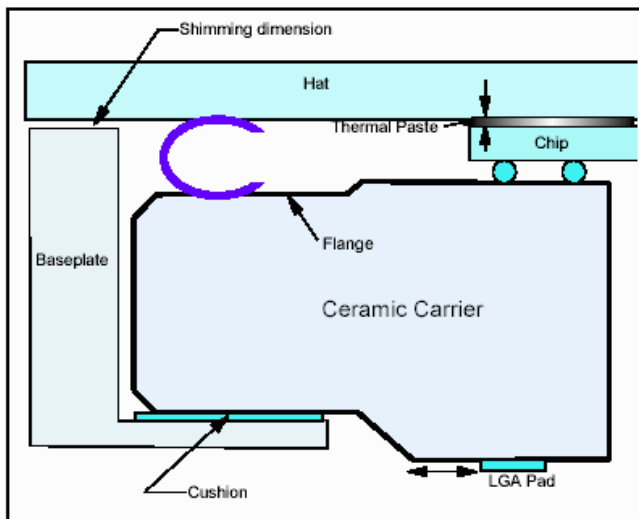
TCM assembly showing direct sealing to the ceramic chip carrier.
